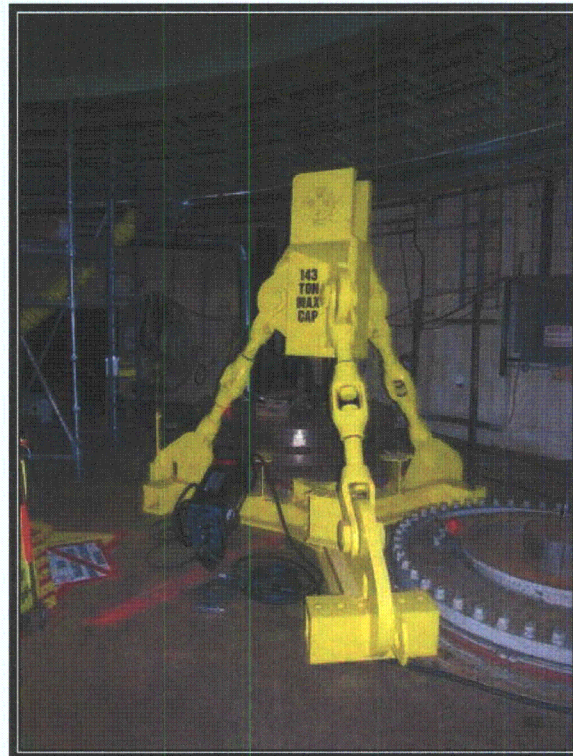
Three-point lifting device for rotating shield plug (Photograph by RCG&A, 2008)
